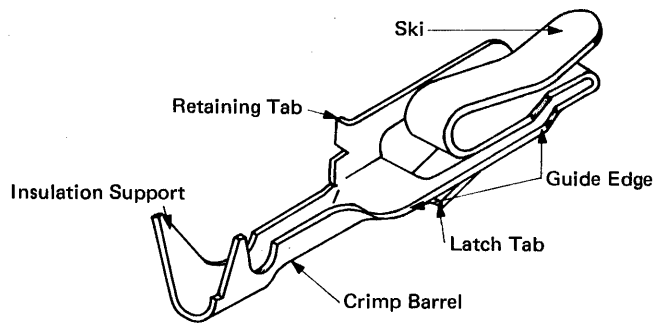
SIOC to Device Interface Cable Assembly Details
